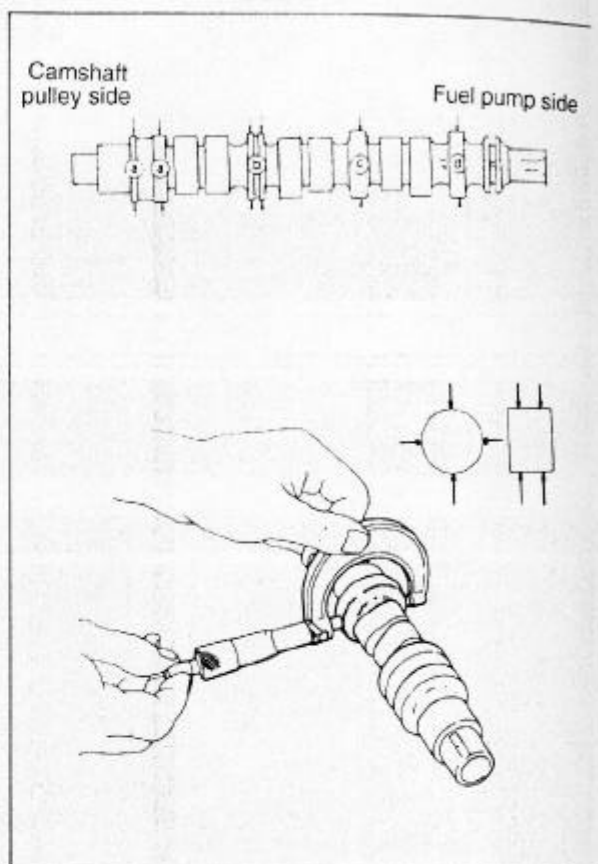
A — 50 MEASURING DIAMETER OF CAMSHAFT JOURNAL
